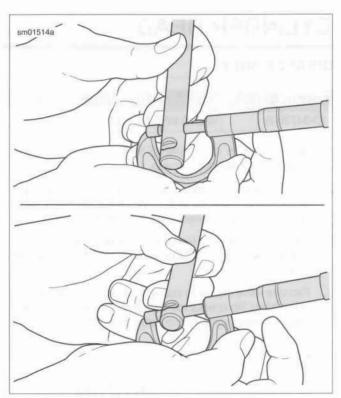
Measuring Rocker Arm Shaft Diameter at Bushing Position (top) and Cover Position (bottom)
